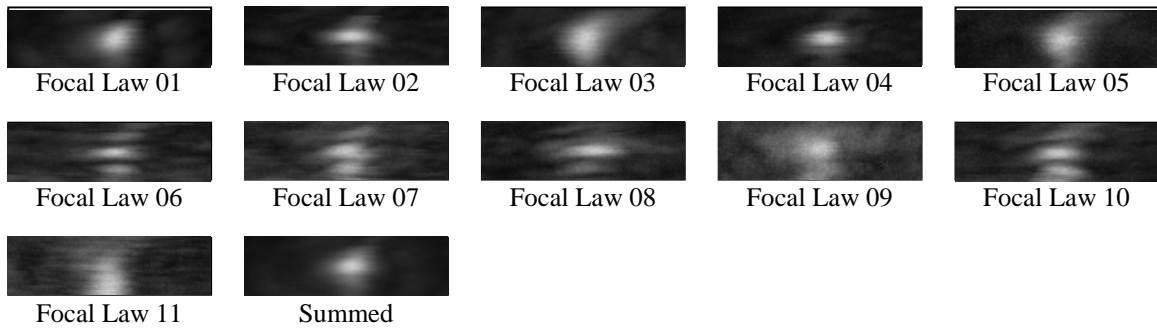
3D method inspection C-scans of curved interface forging coupon #7.
